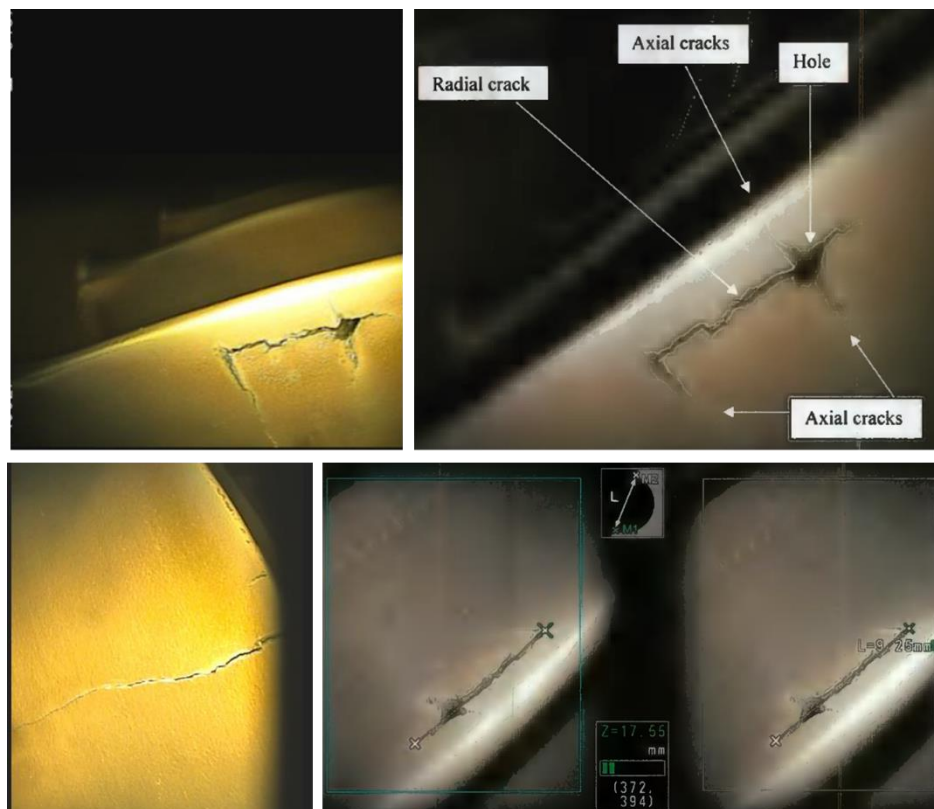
Example of a borescope inspection of CFM56 LPT nozzle guide vanes stage one. The pictures show intersecting cracks and hole.
